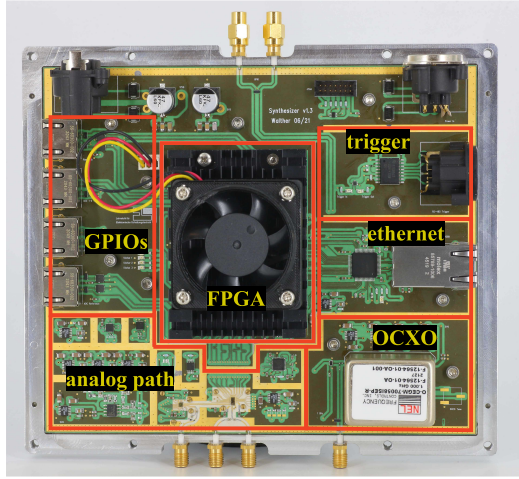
Manufactured chirp generator, including the FPGA and the custom PCB.
